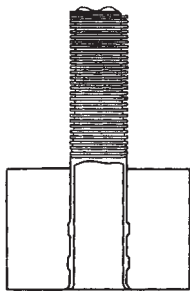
Integrally finned tube rolled into tube sheet with double serrations and flared inlet. (Woverine Division, UOP, Inc.)
